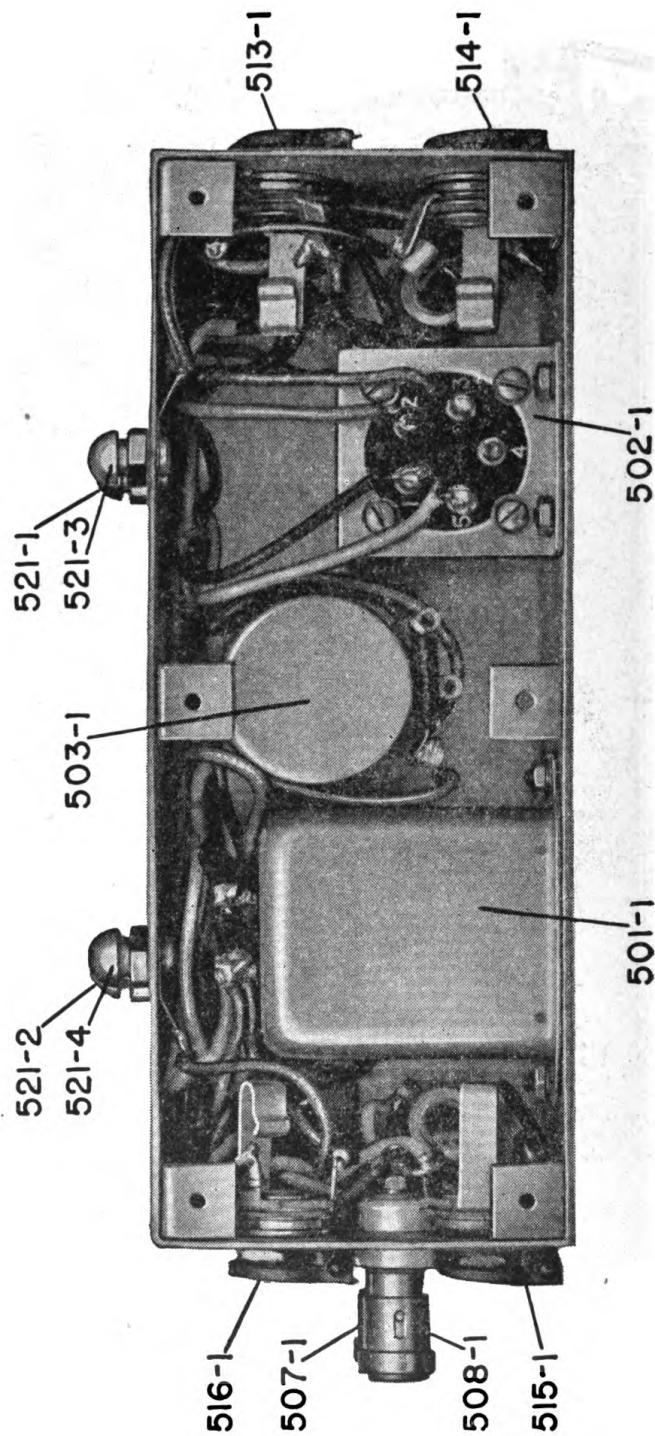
Control Unit RM-35-B, bottom view showing wiring.
